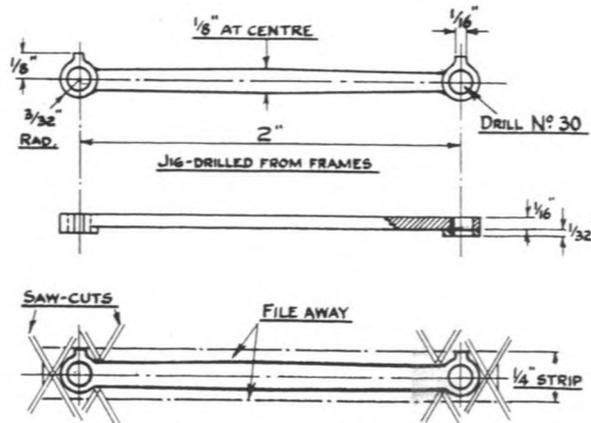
Coupling rod, showing suggested method of cutting to shape. (Actual size 7 mm. scale.)
